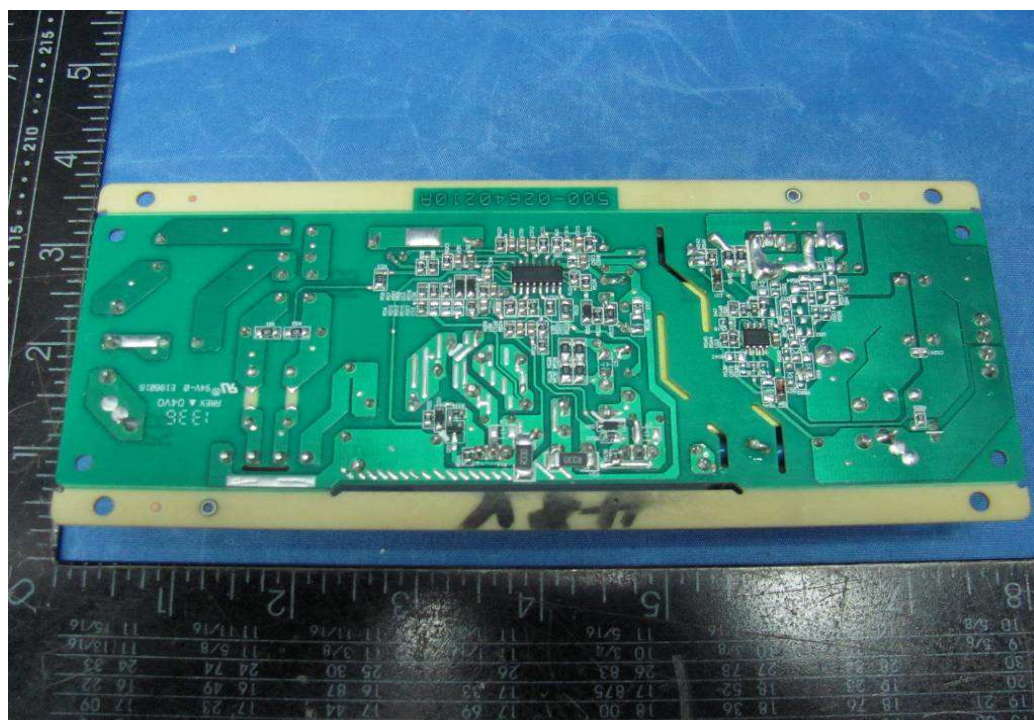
GT\*41133 series Soldering side view of PCB for open frame model
